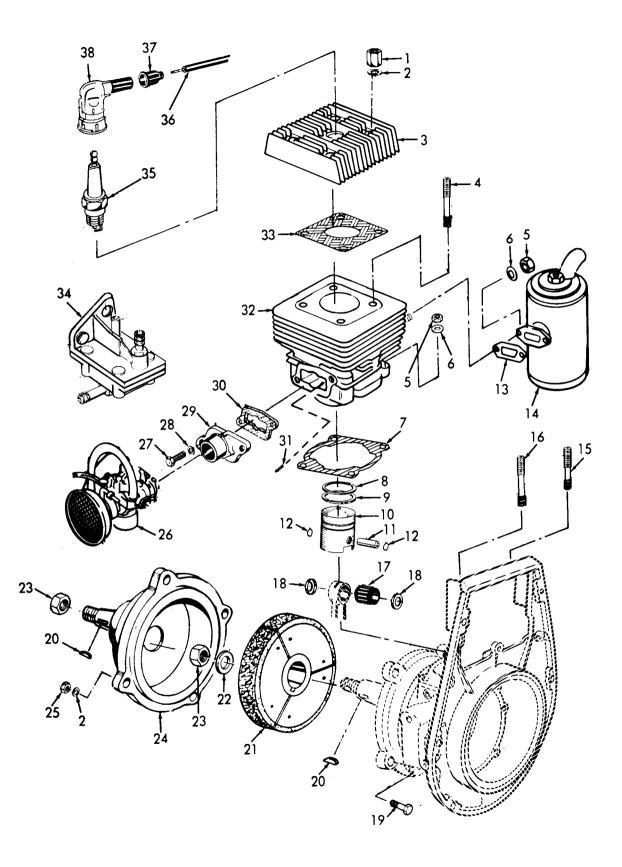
Gasoline Engine Assembly (Sheet 1 of 2).
